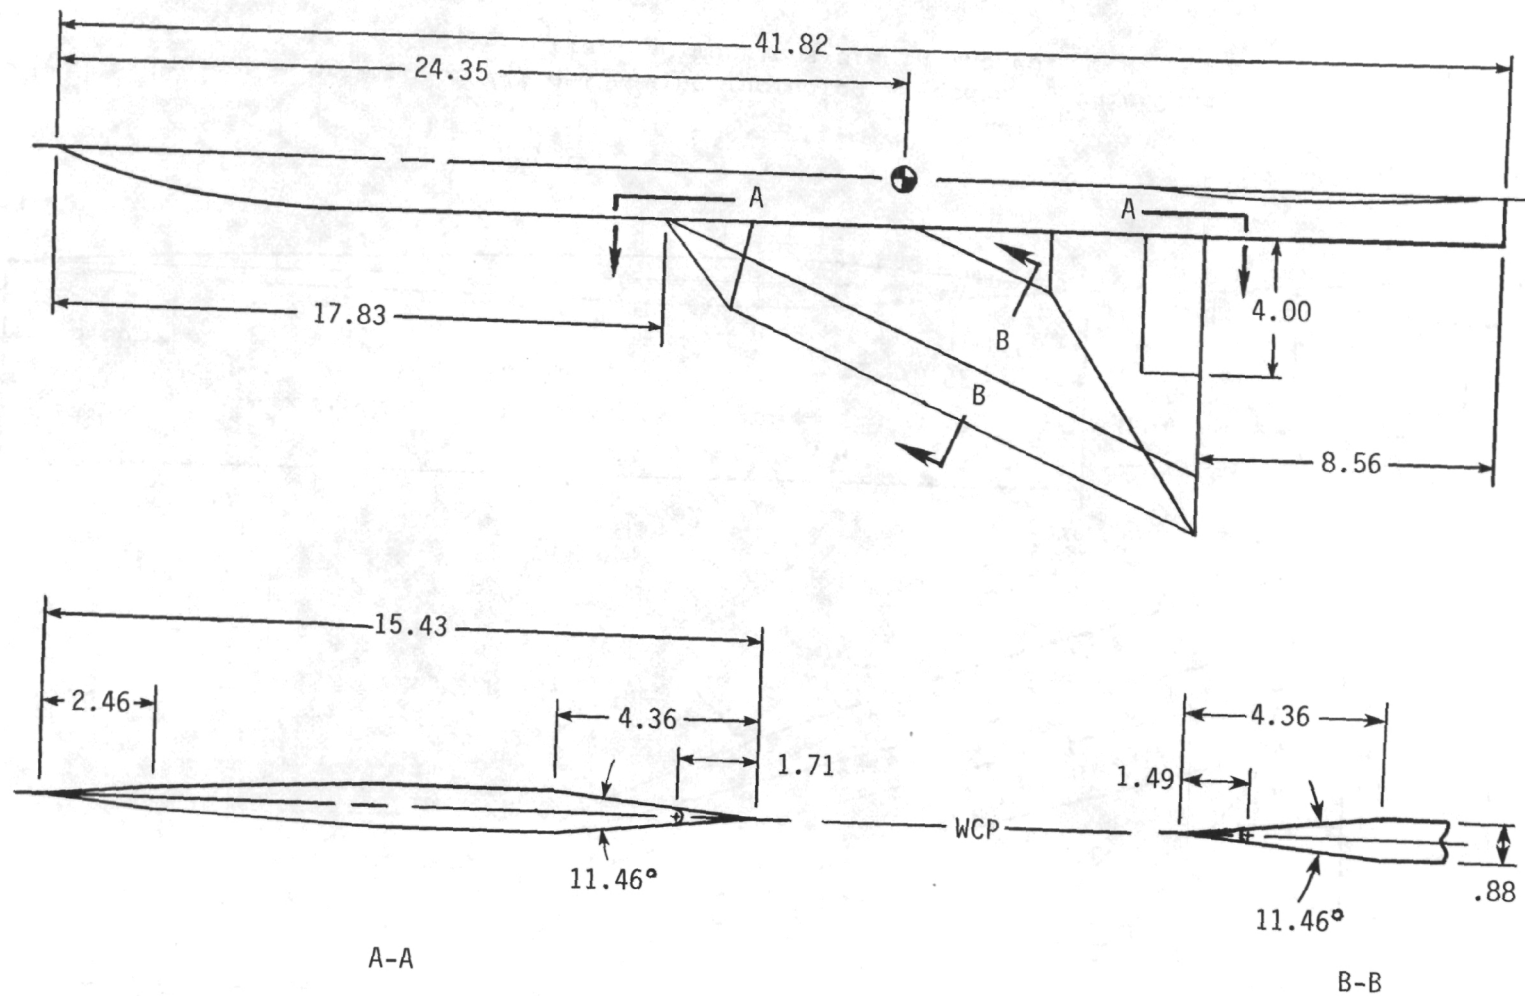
Drawing of 66° delta wing. Dimensions are in inches.
